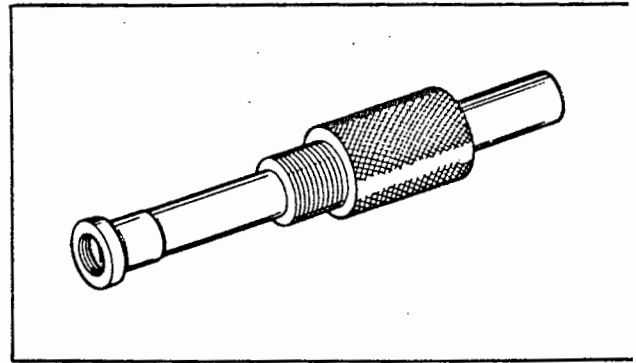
T27247 Bleeder Tube Drain Adapter
